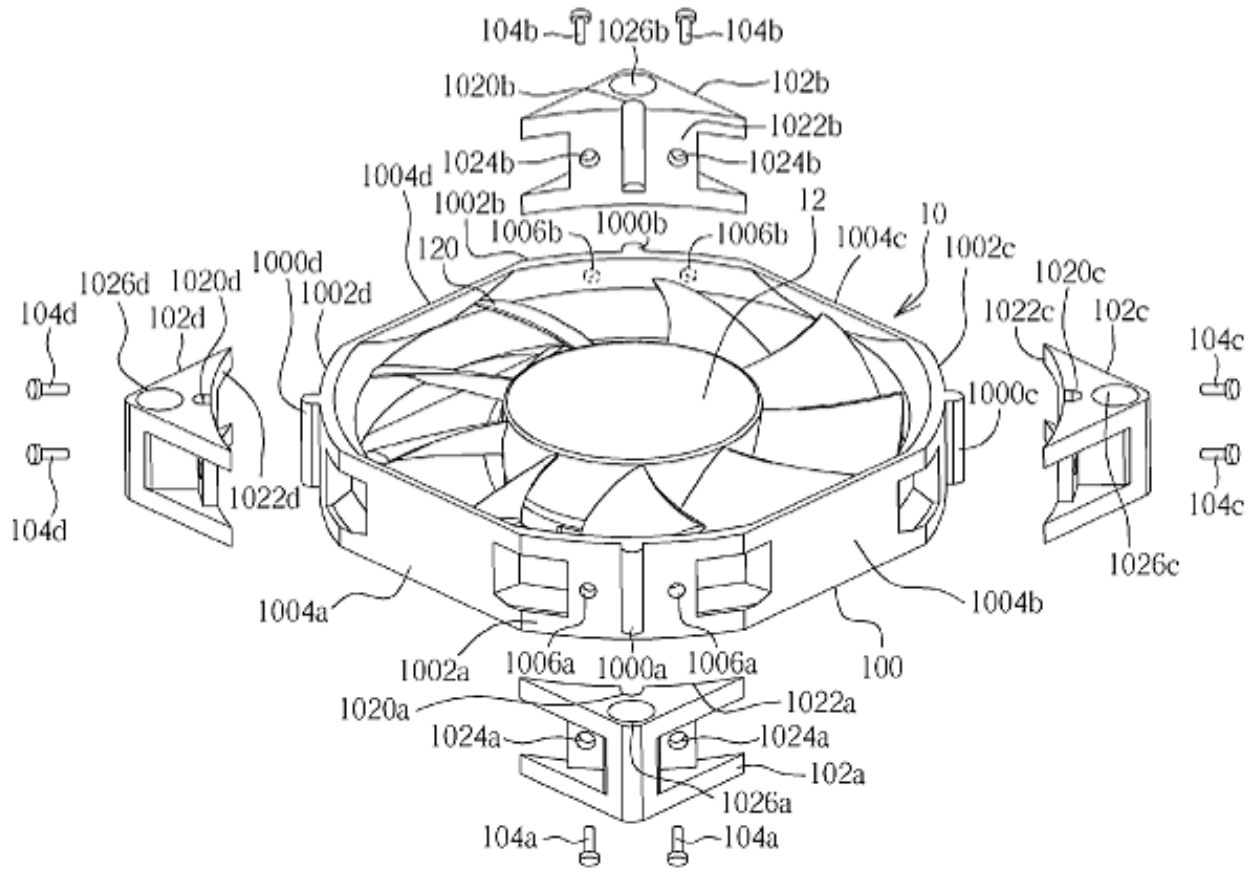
Schematic of Custom Fans with Flanges Removed [43], [44]
